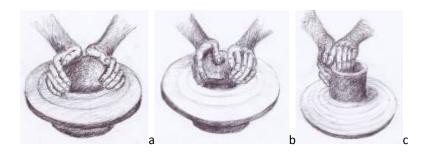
The shapping process using spinning table, consisting of: a. Preparing clay pattern, b. Making bowl shape, and c. Extending the bowl upward and making even thickness by spinning it.
